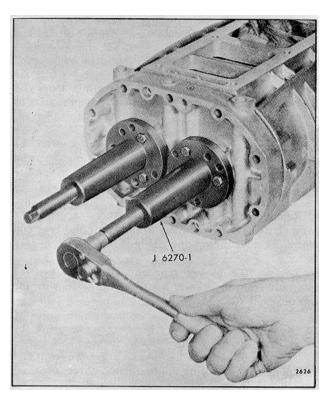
Removing Blower End Plate and Bearings from Housing and Rotors
